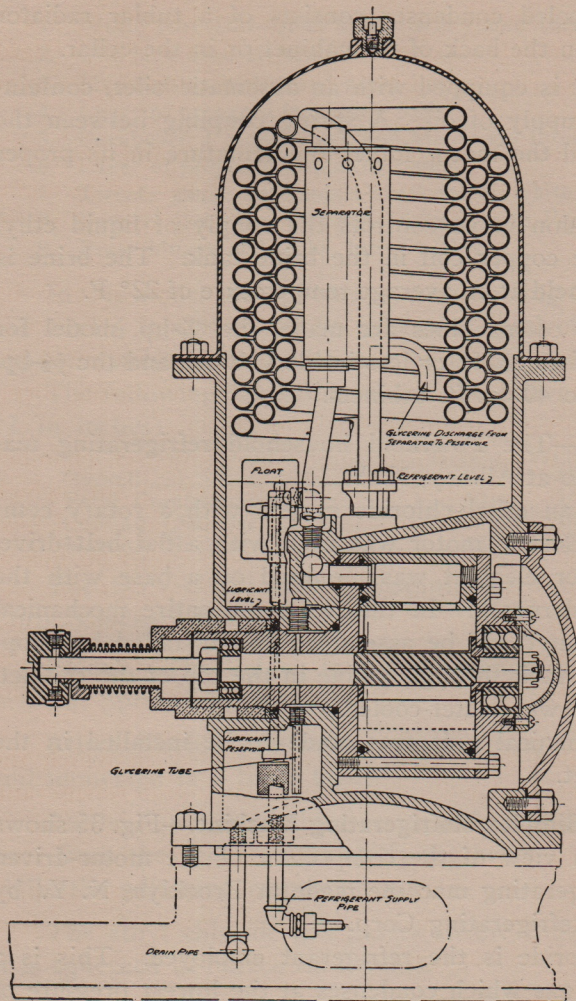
WILLIAMS REFRIGERATING MACHINE.
